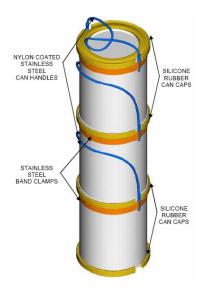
ES-3100 SHIPPING CONTAINER
